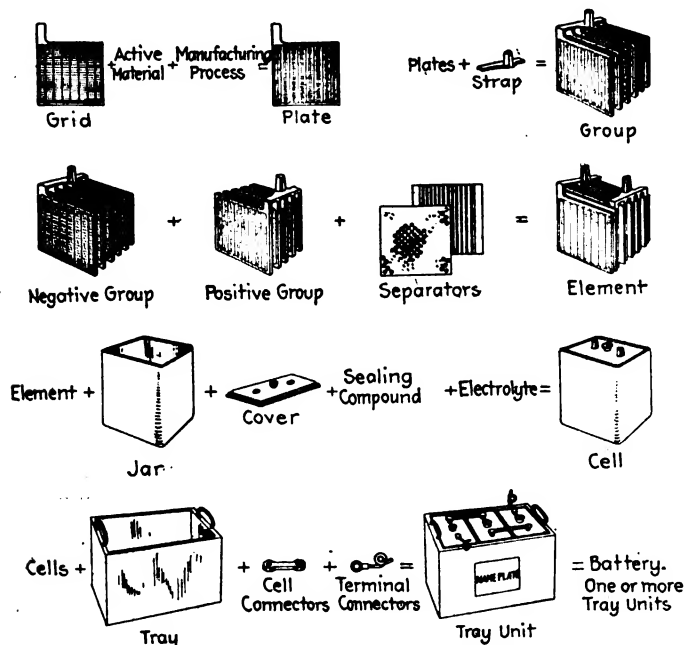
PARTS AND ASSEMBLY OF TYPICAL MOTIVE-POWER STORAGE-BATTERY
